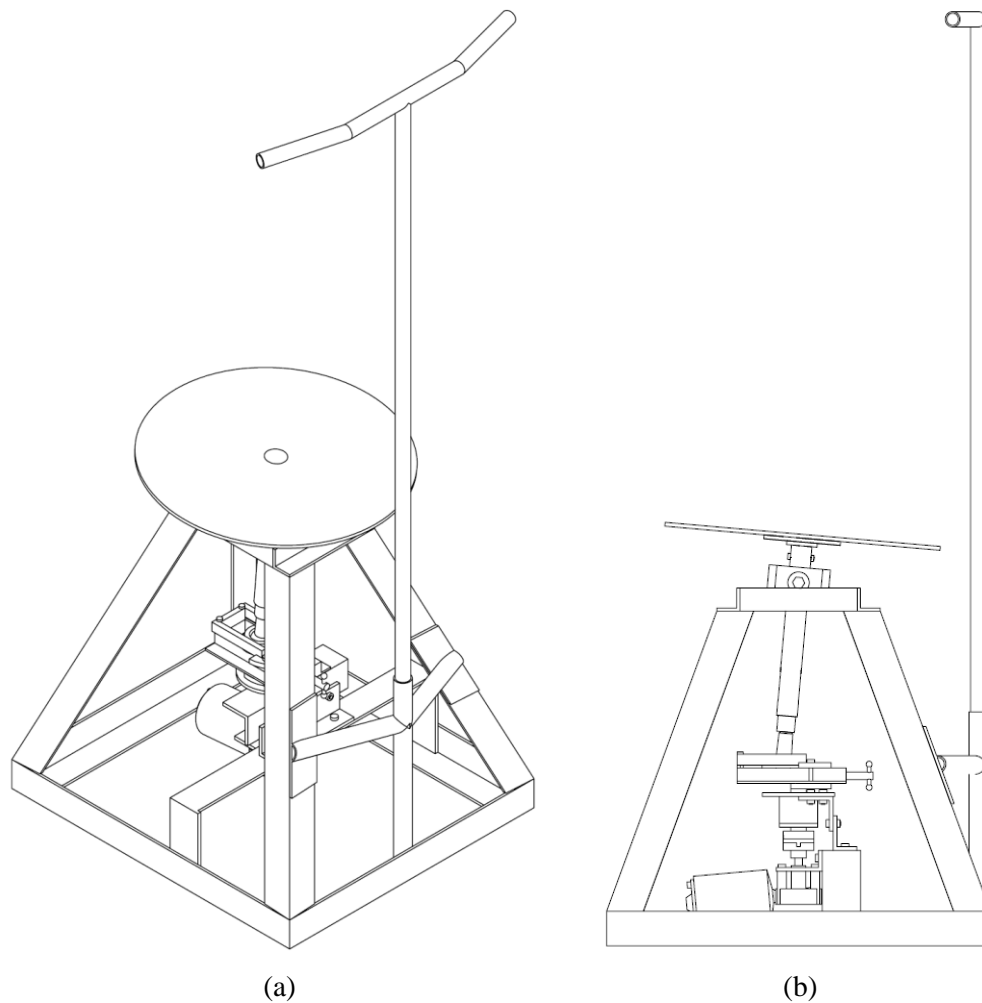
CAD model of the platform: a) 3D view; b) side view.
